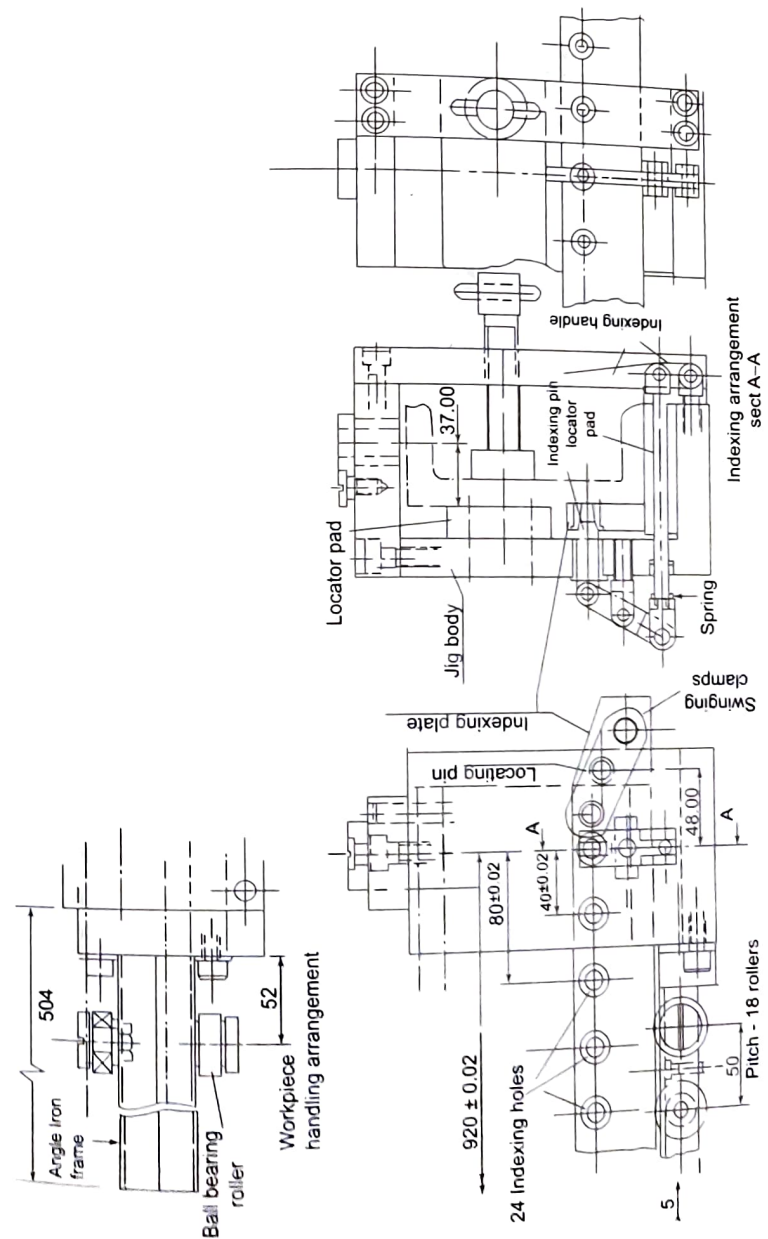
Drill jig for workpiece in Fig. 4.2b
